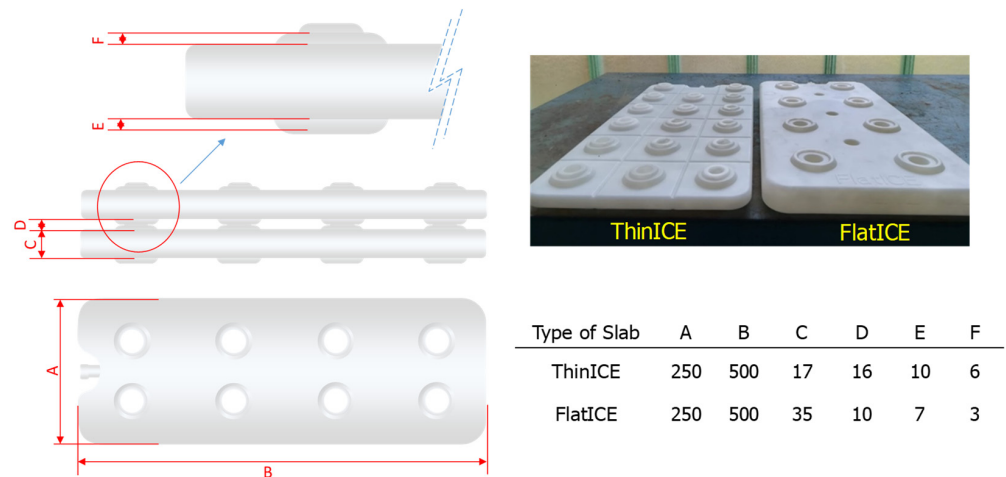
ThinICE and FlatICE slabs encapsulation. Dimensions in millimeters.
